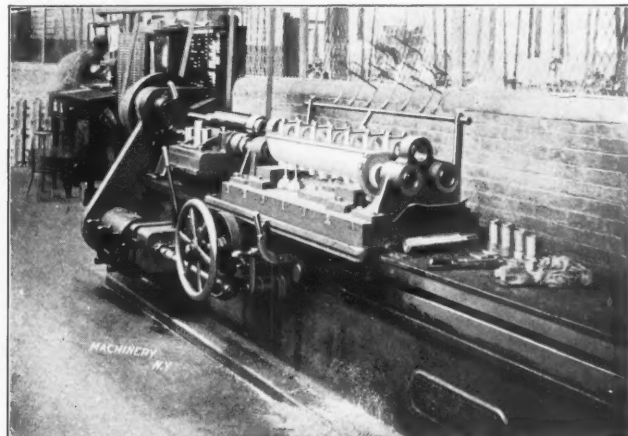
Machine for Boring the Crank and Cam-shaft Bearings at the Same Time
